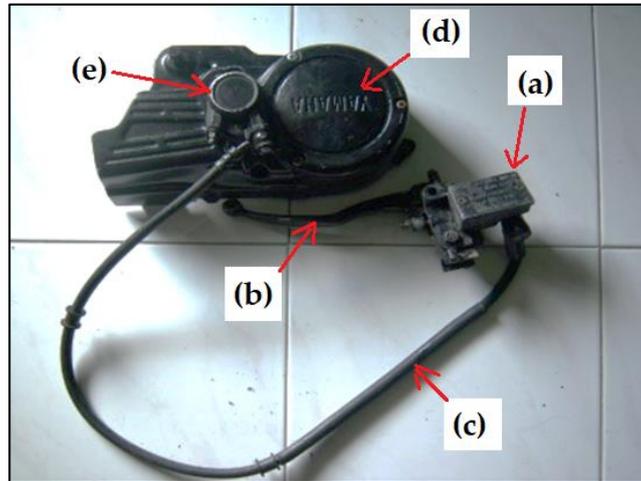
Hydraulic operated clutch set: (a) Master cylinder, (b) Handle, (c) Fluid hose, (d) Engine blok, and (e) Release cylinder
